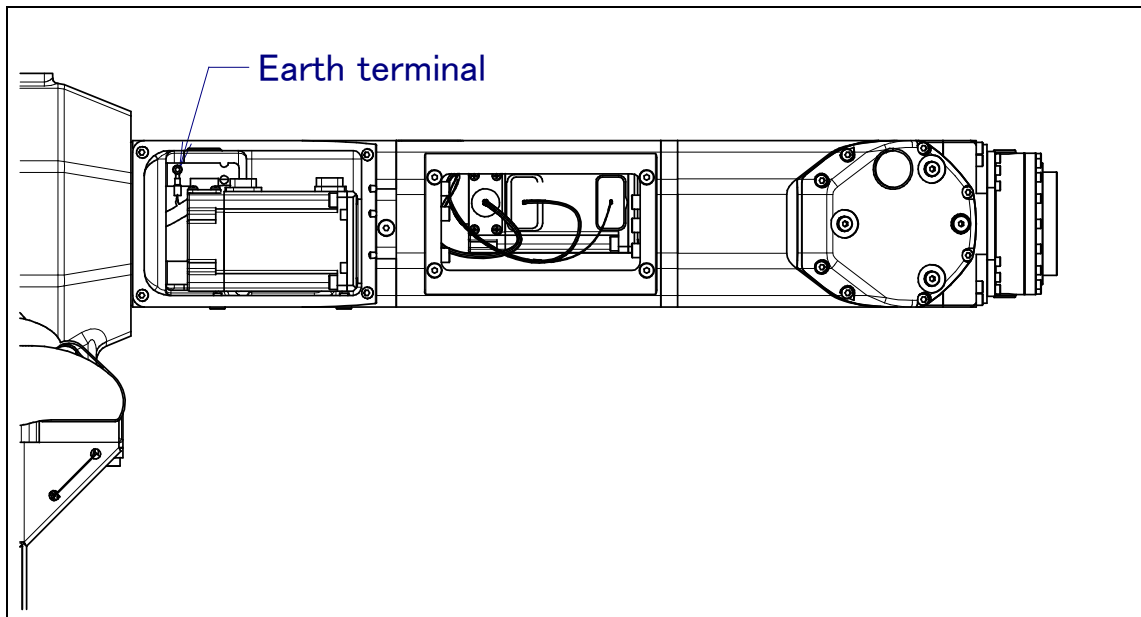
(c) Replacing cable kit (J3 arm part 2)
